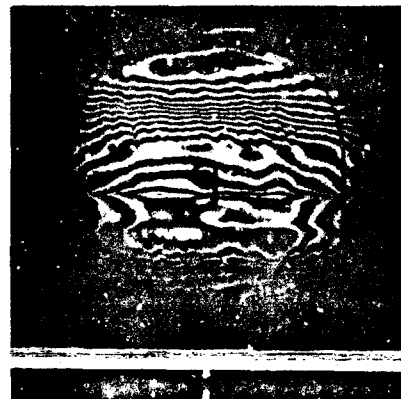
GFRP-Tank with a Horizontal Crack at the Tank Center
